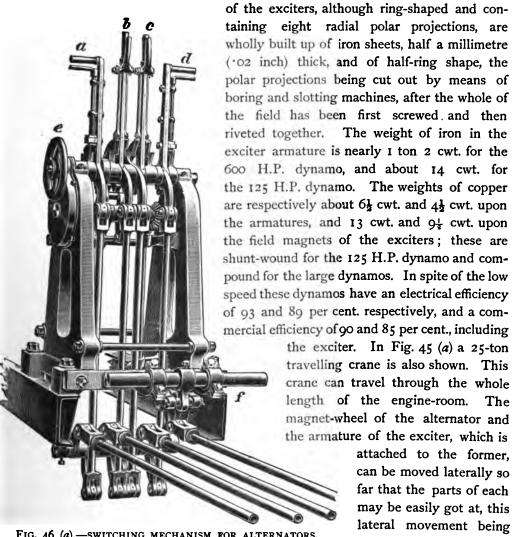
(a).—SWITCHING MECHANISM FOR ALTERNATORS.
